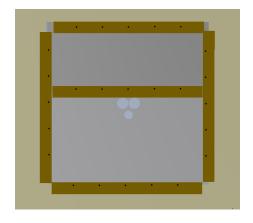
b 2 inch X 25 inch aluminum strip attached(Bottom view)
